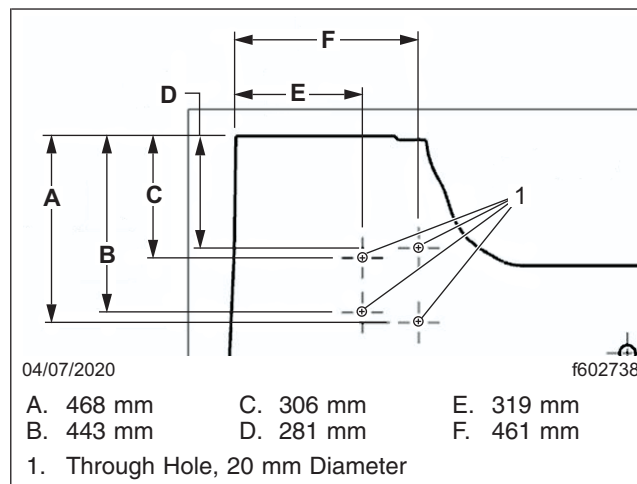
, Push Nut Hole Dimensions, LHD Vehicles
